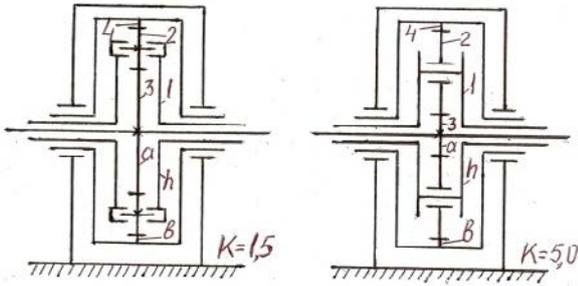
Schematics of simple three-link planetary gears with different internal parameters: left $K = 1.5$; right $K = 5$: 1-opinion carrier (h); 2-satellites; 3-sun gear (a); 4-ring gear (b) Raypath plots of the planetary gears
